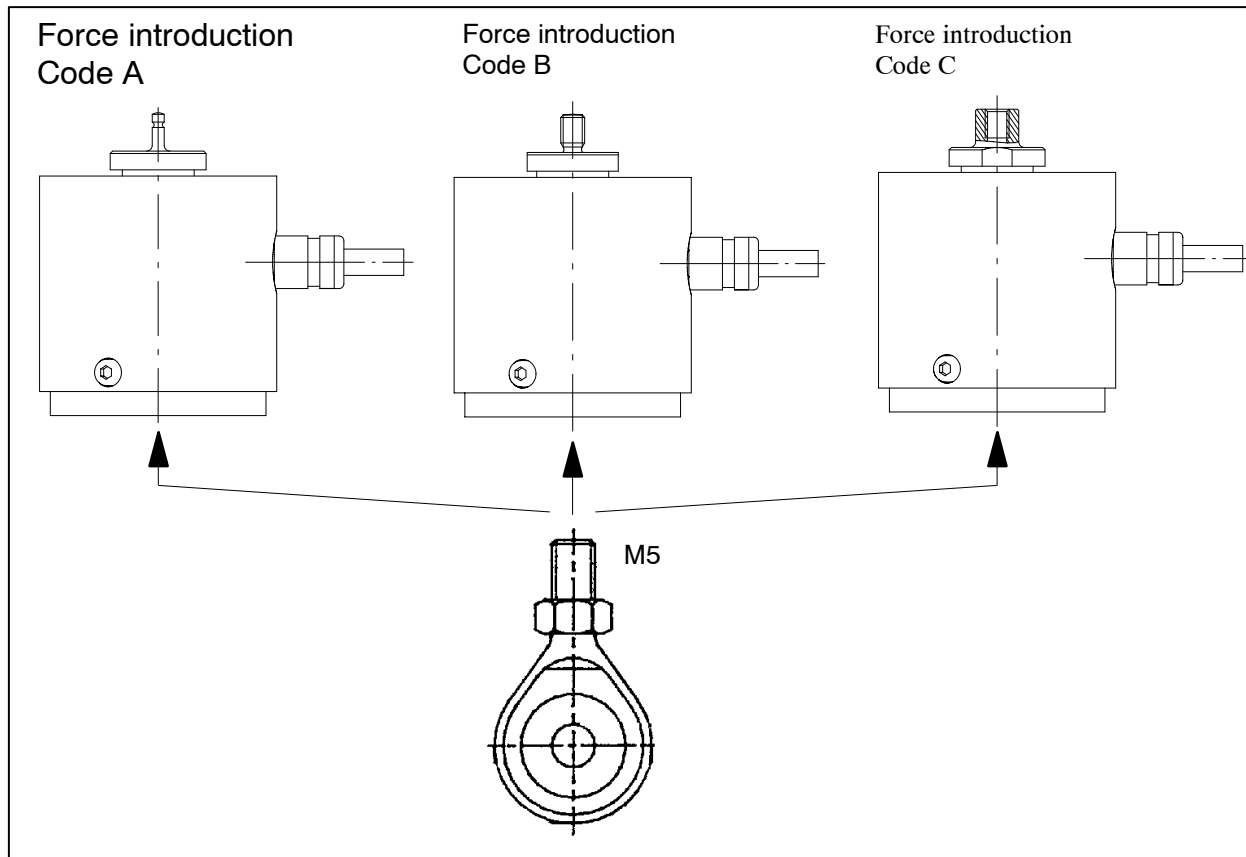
Mounting with coupling and knuckle eye ZGO
